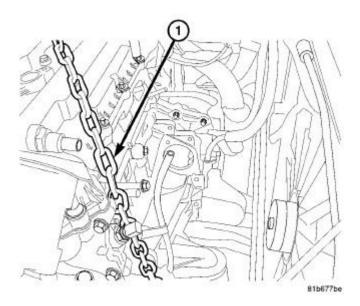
Lift Chain Courtesy of CHRYSLER GROUP, LLC
